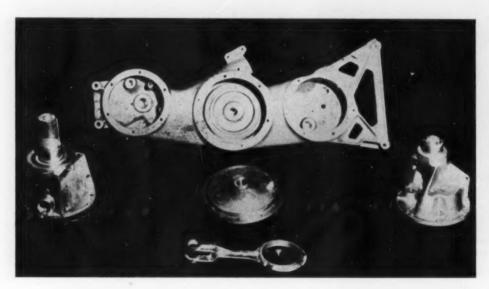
Machining of these sand cast aluminum gear-case parts, consisting of three covers and a connecting rod for Easy home washers, is done on highly efficient, semi-automatic machining lines.
